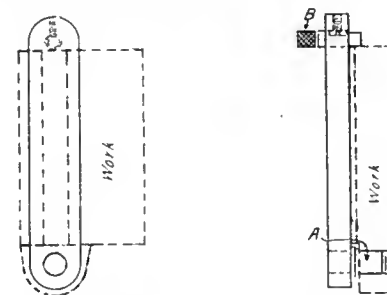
GAUGE FOR TESTING RELATION OF HOLE TO END OF WORK.
